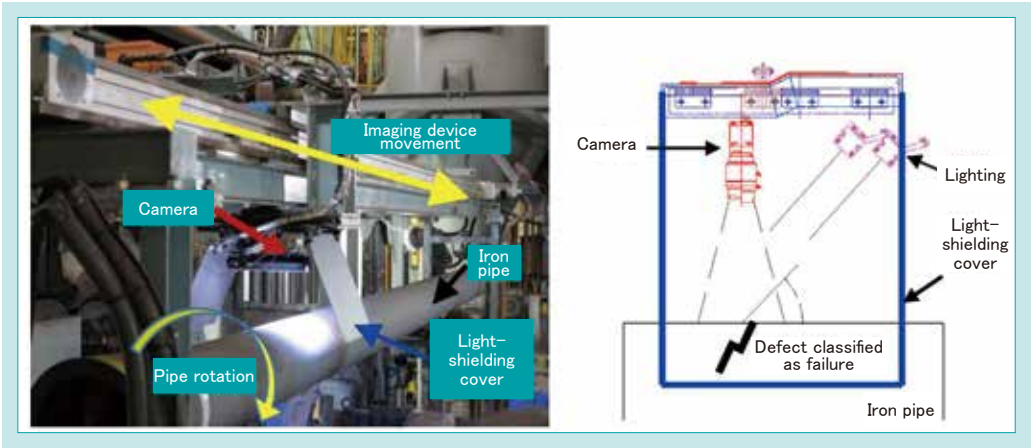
Appearance of Inspection Equipment and Configuration of the Imaging Device
